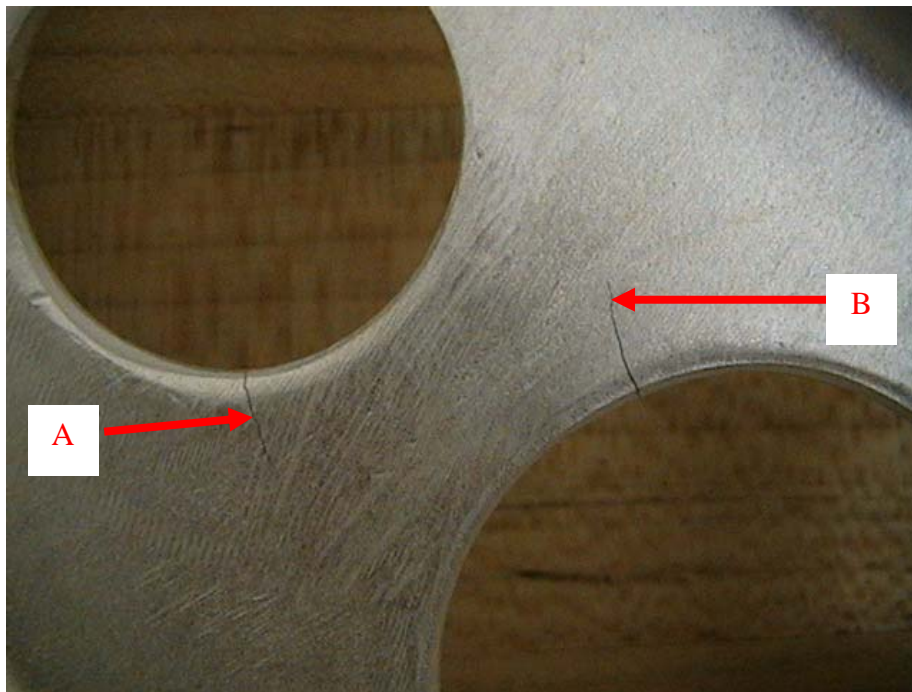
Two Cracks in the Cessna 402A Left Wing Tip Tank Baffle
